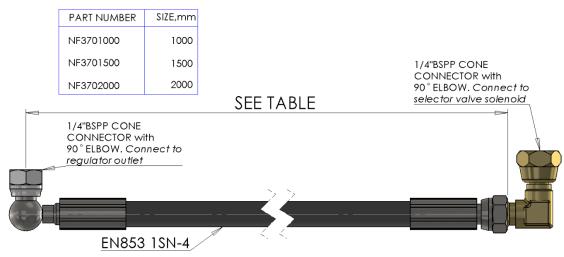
Connection Hose - Selector Valve - Connecting Hose
